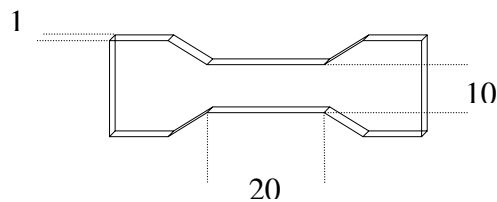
sample dimensions for the tensile test, in millimeters.
